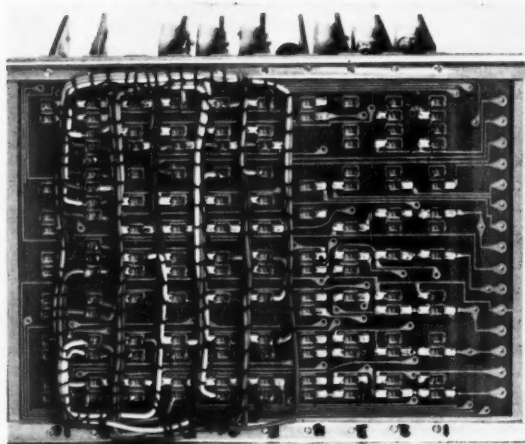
Interconnection board, identical to that of Figure 1, which has been produced in the laboratory by printed-circuit techniques.
